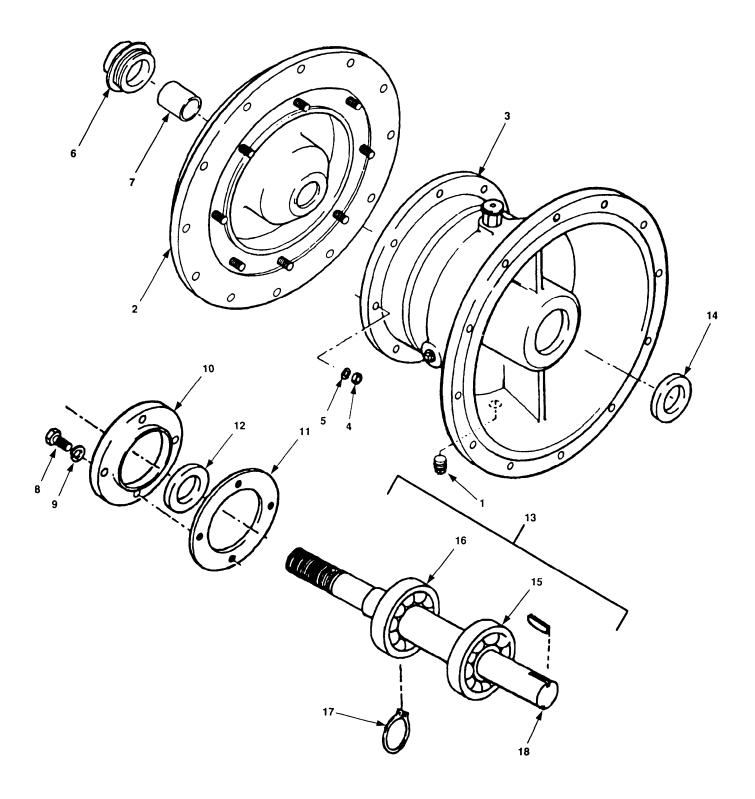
Sleeve and Rotating Assembly Maintenance.
